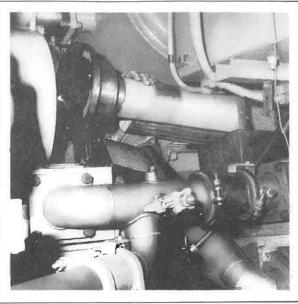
BLOCKING LONG SHAFT AT ENGINE END.
